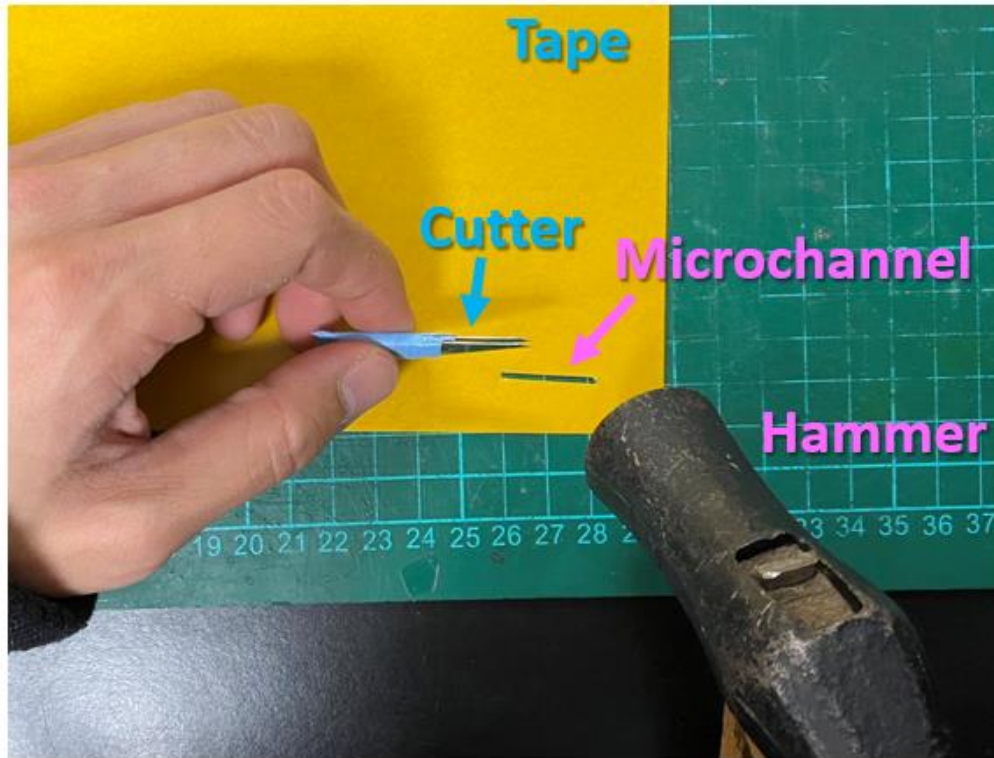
The picture of microchannel fabricated using manual cutting with a custom-made metal mold in double-sided adhesive tape.
